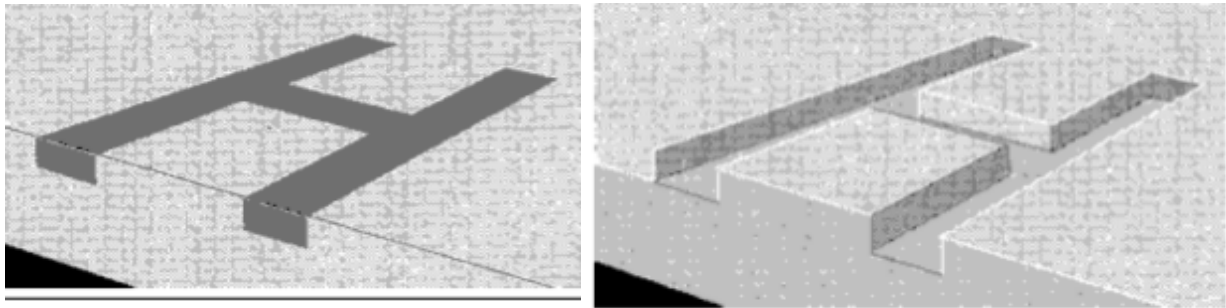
Laser marking (left) and laser engraving (right) [47].
